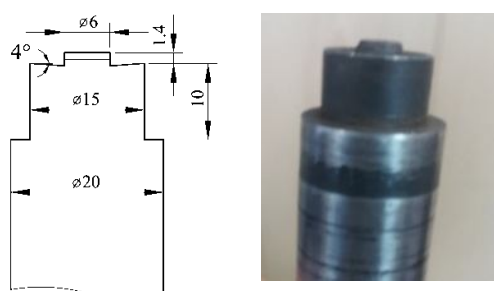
Schematic of Friction stir spot welding tool
